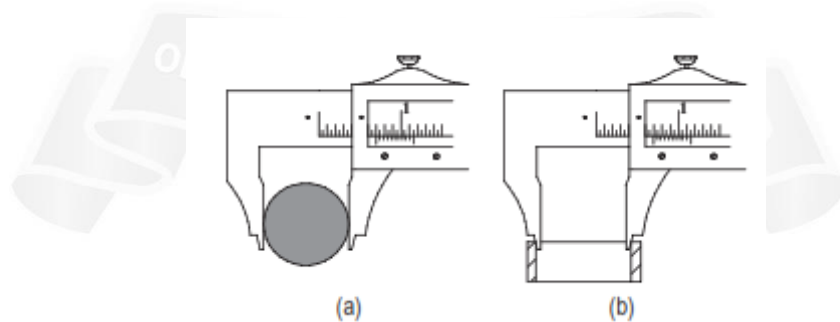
Measurement of dimensions (a) Outside dimension (b) Inside dimension
